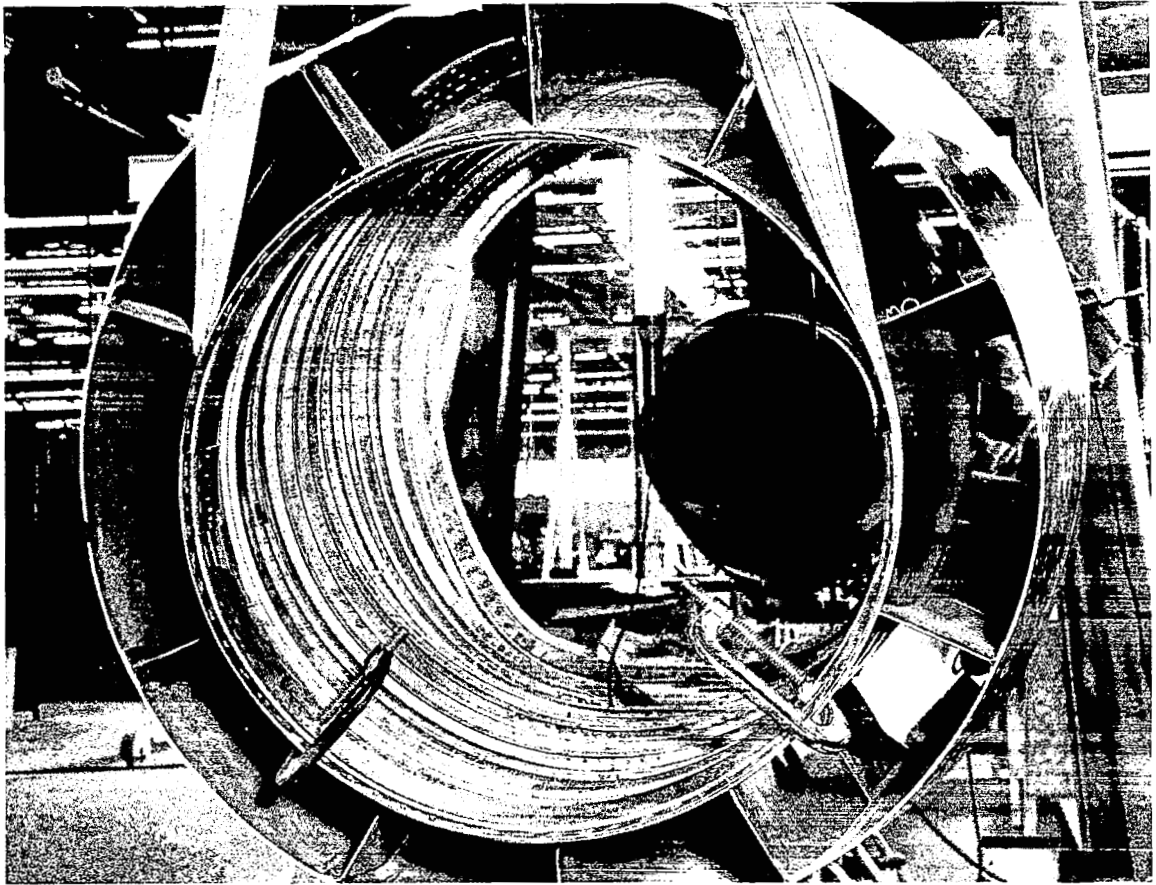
FLIGHTWORTHY NACELLE DRILL AND ASSEMBLY FIXTURE
